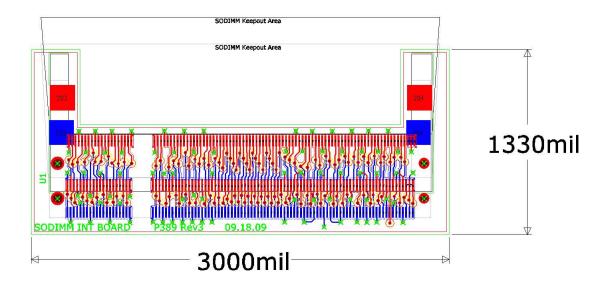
SODIMM Interposer Board Assembly Top Diagram.
